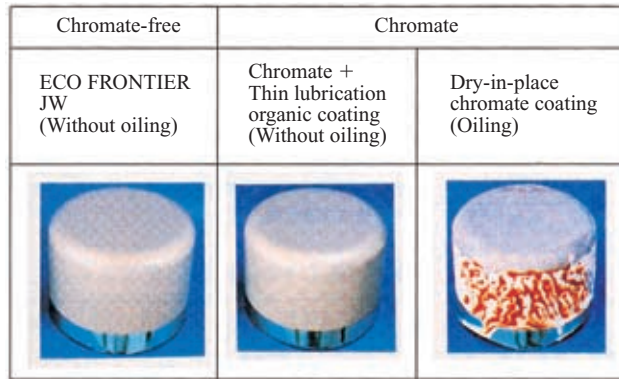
Corrosion resistance after forming of various coated steel sheets (SST 120 h)
